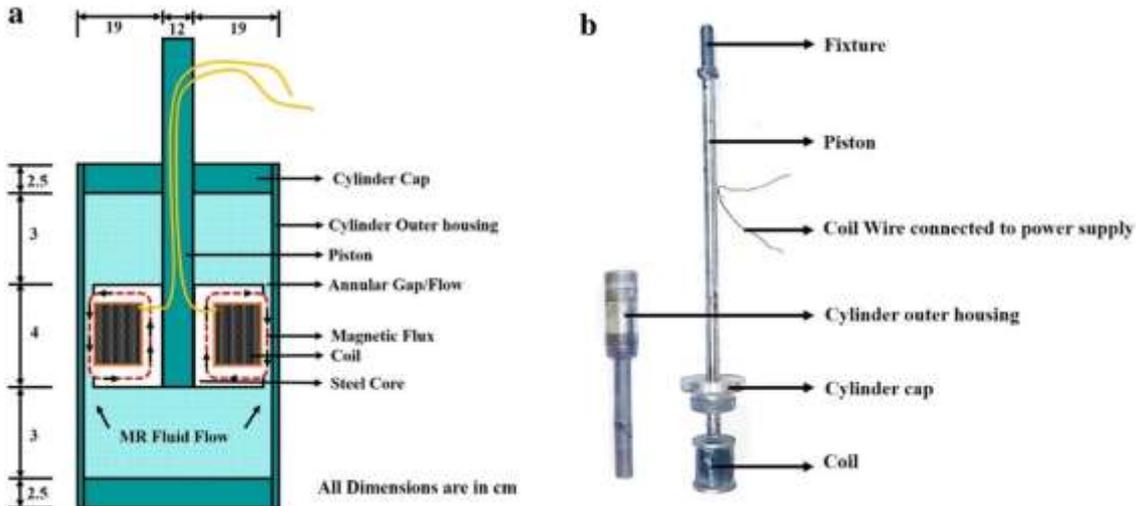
a Section view of proposed MR damper, b fabricated MR damper
